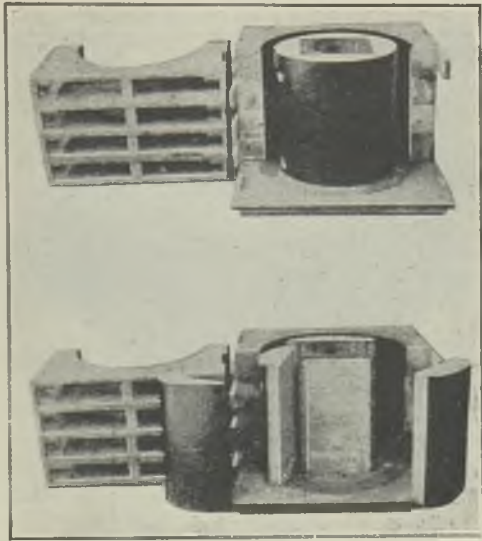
CYLINDER WATER-JACKET COREBOX.
